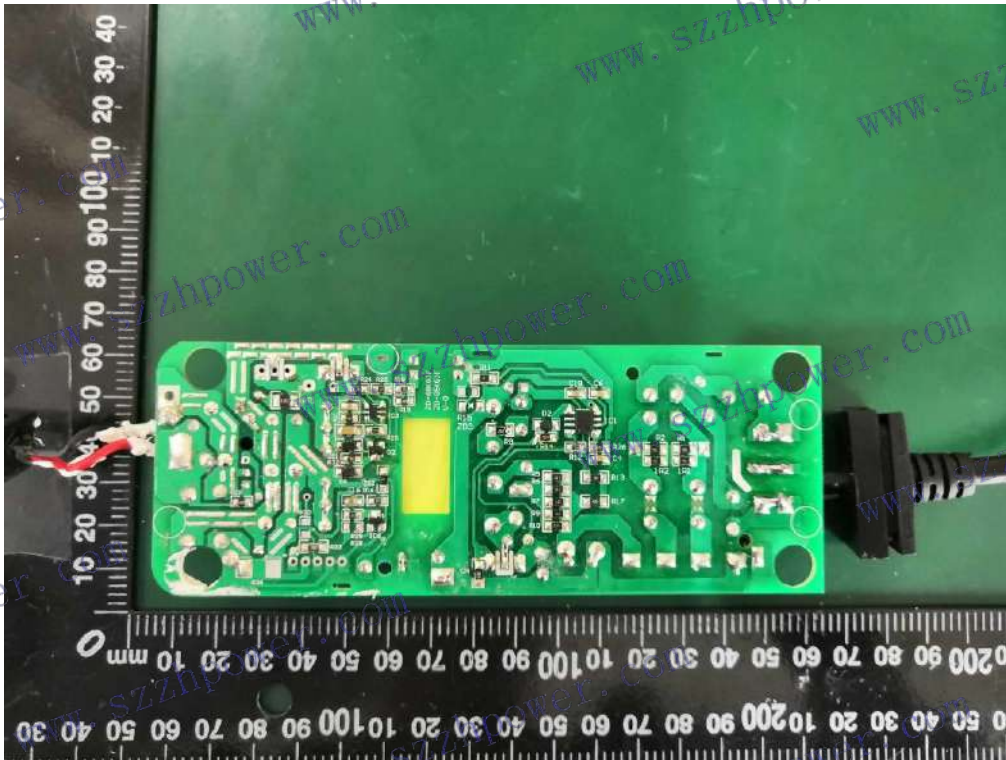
Bottom view of PCB for models ZH100DU-xxxxyyyWz, KS100DU-xxxxyyyWz
